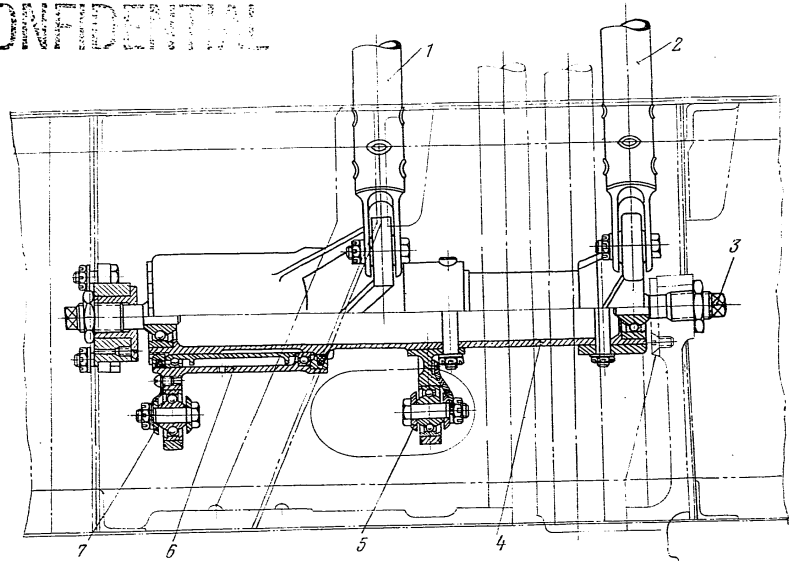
ENGINE SELECTOR CONTROL SHAFT
